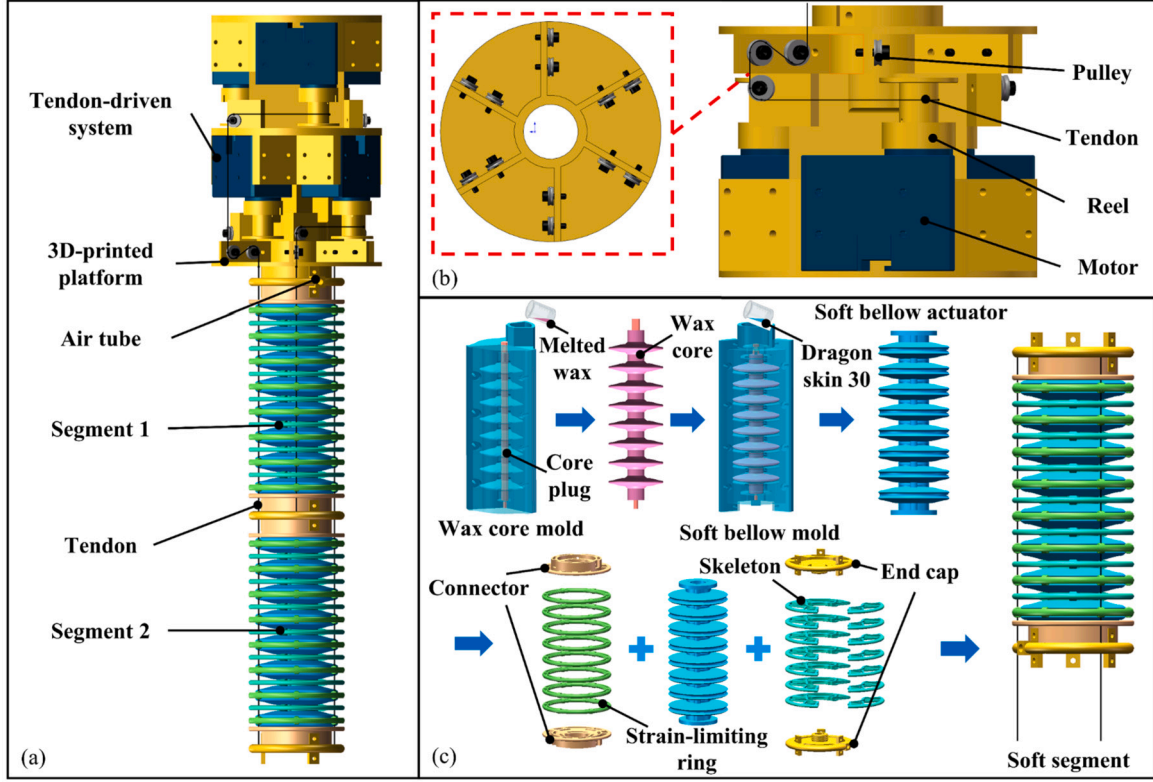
Architecture of the hybrid-driven origami continuum robot. (a) Layout of the soft manipulator and prototype assembly. (b) Tendon drive system. (c) The fabrication process and assembly of the soft segment.
